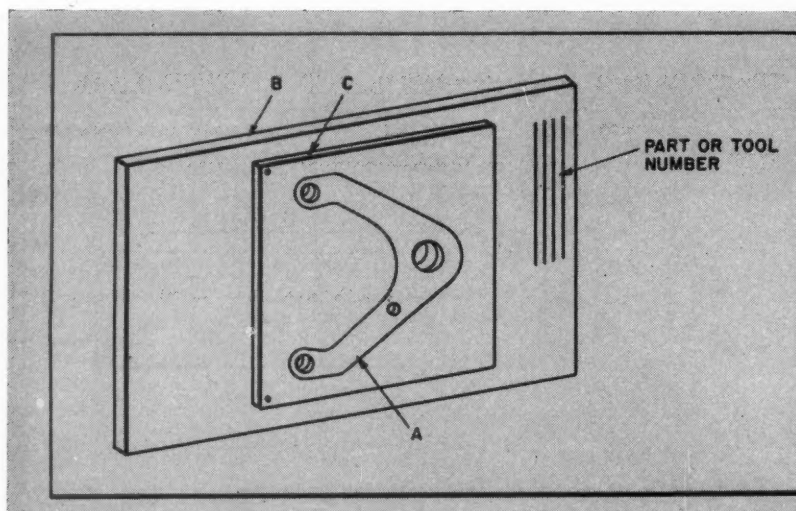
Special piercing fixture, consisting of plate (B) and nest (C), for accurately locating blank (A) during the piercing operation
